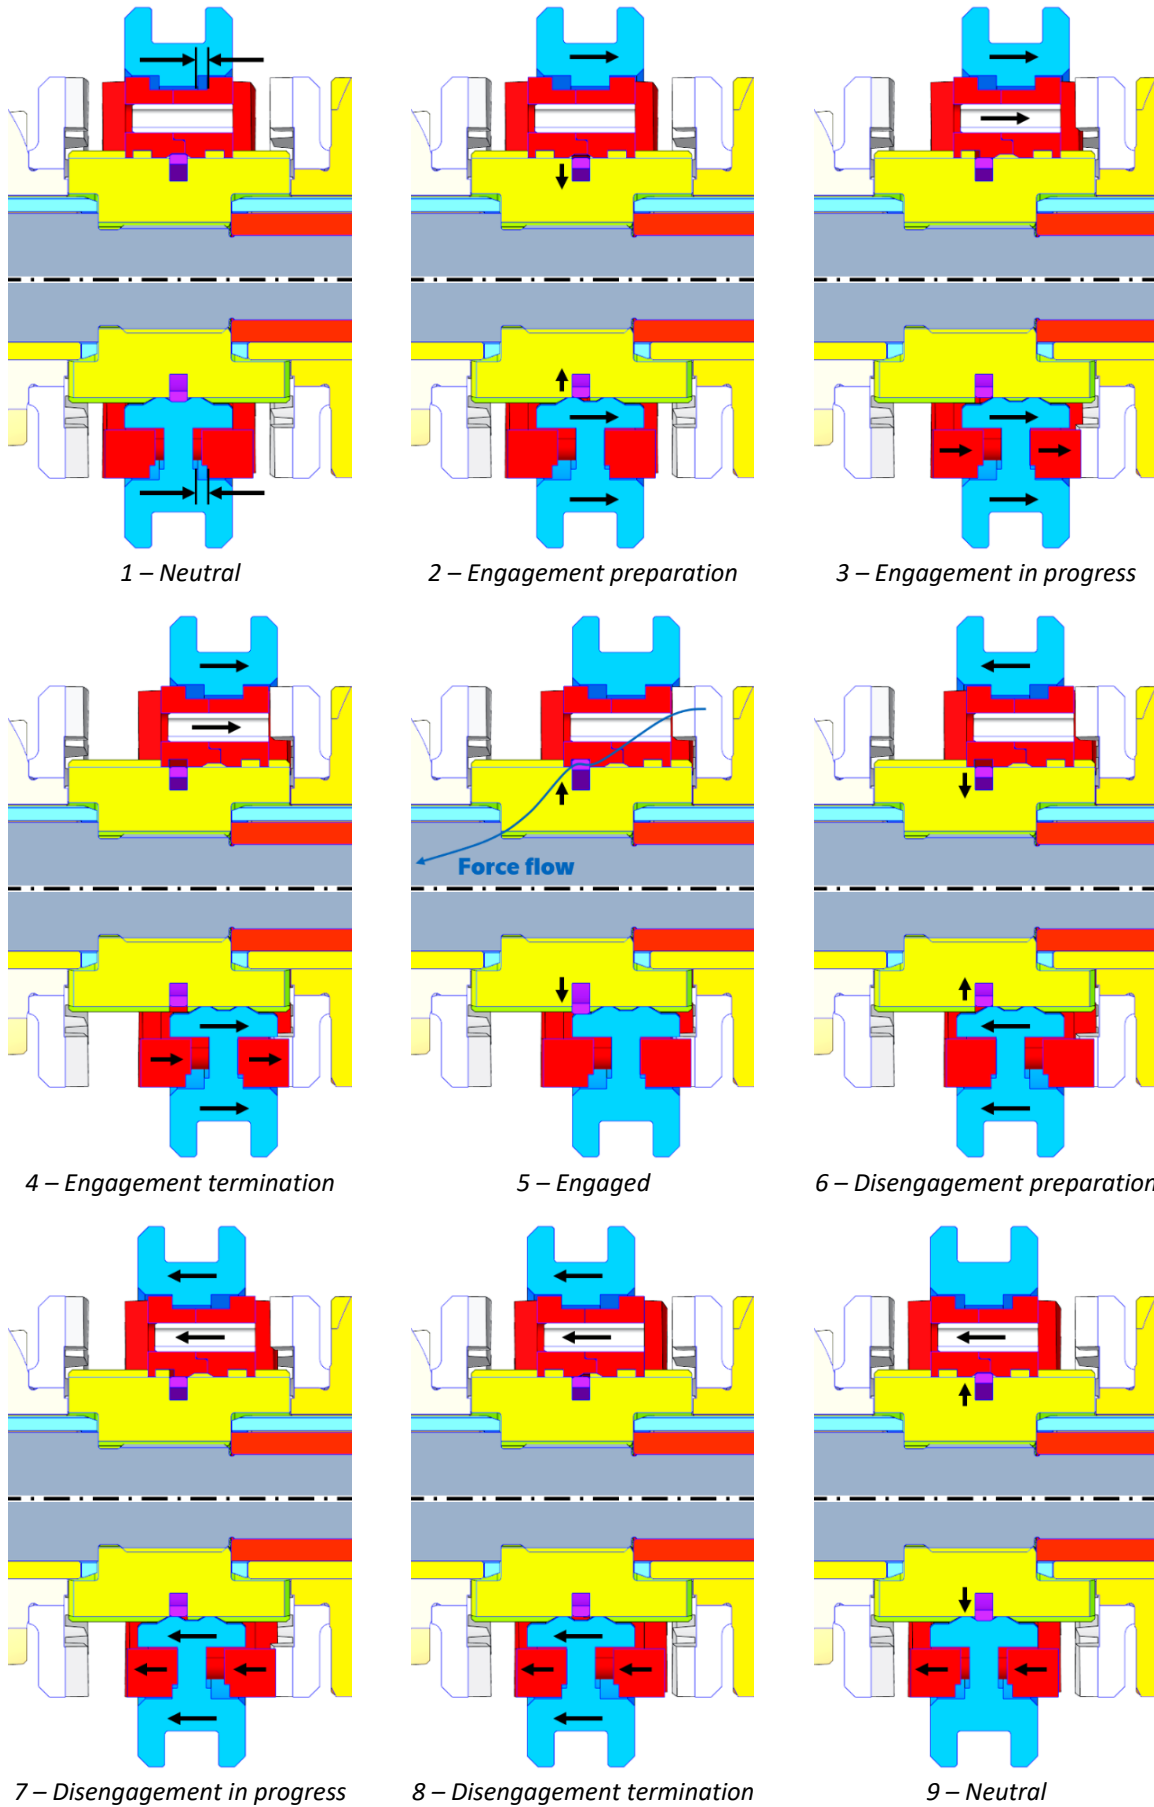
Gearshift process of the dog clutch with blocking mechanism
